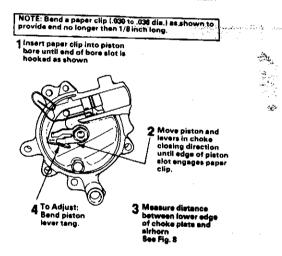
CHOKE QUALIFYING (INTEGRAL CHOKE)
